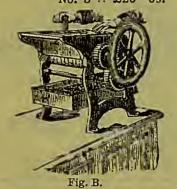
Fig. B.—A small useful Machine, capable of making 10 lbs. of Pills per hour, particularly adapted for persons making small quantities,
